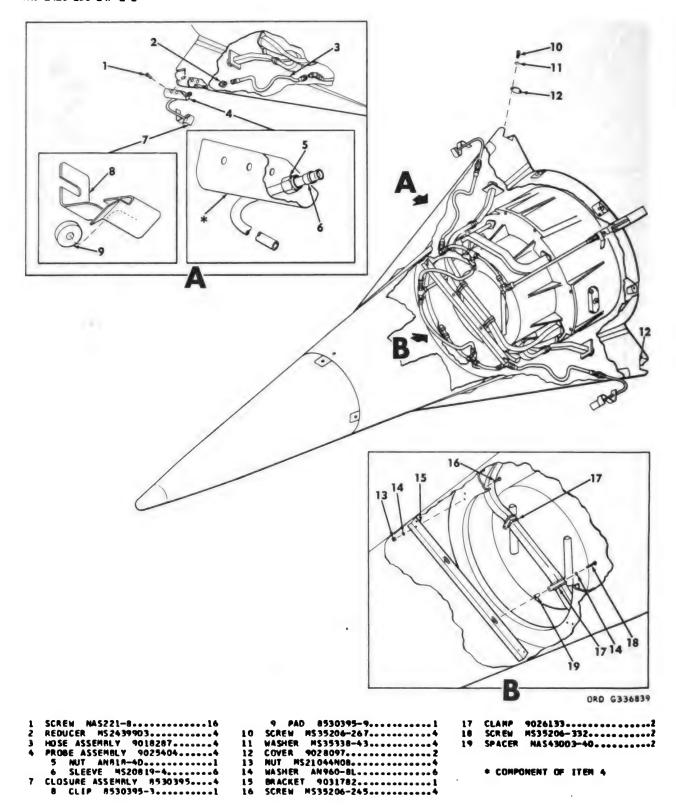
EQUIPMENT INSTALLATION, FORWARD BODY ASSEMBLY /9020575 AND 9979613/
